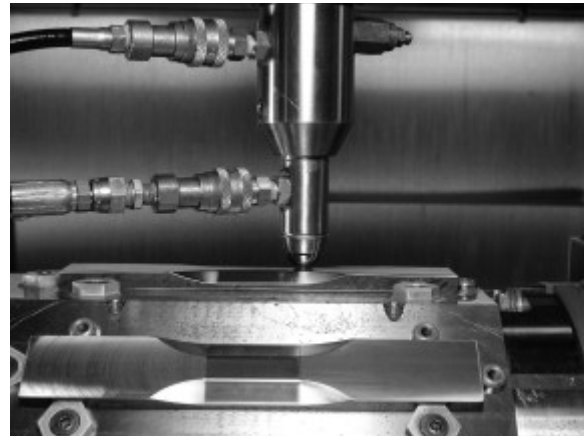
LPB processing of fatigue samples with a single point contact LPB tool in a 4-axis CNC mill.
